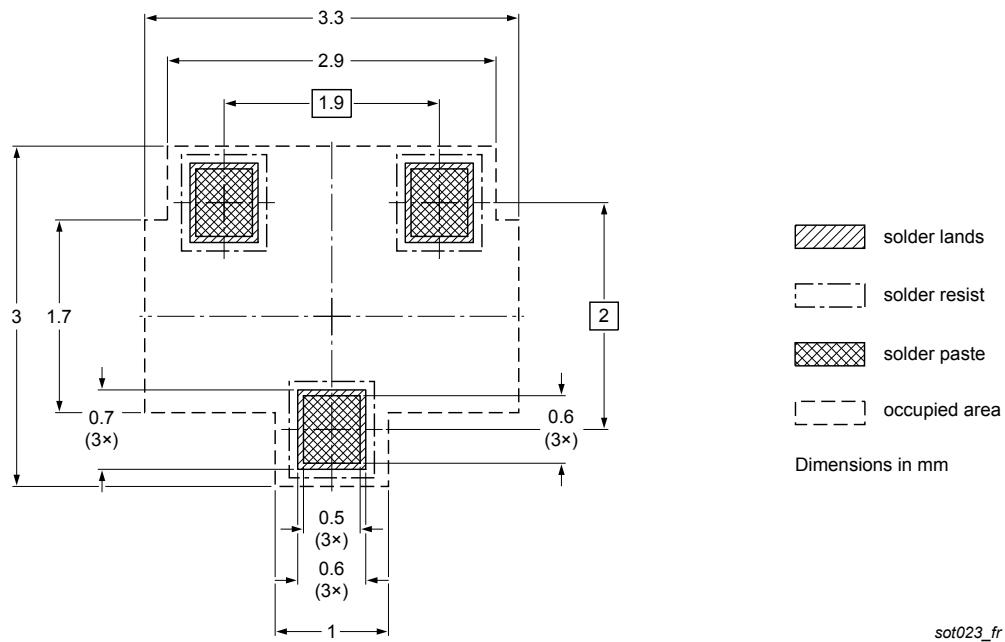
Reflow soldering footprint for TO-236AB (SOT23)
